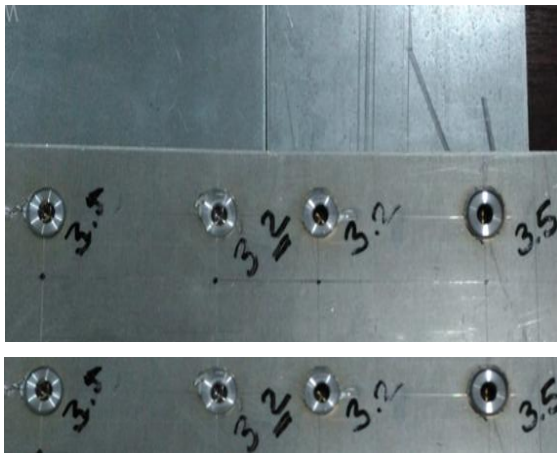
High velocity oxygen fuel (HVOF) sprayed nickel powder coating on welding regions of aluminum alloy AA5754 and DP600 welded steel plates with the friction stir spot welding
